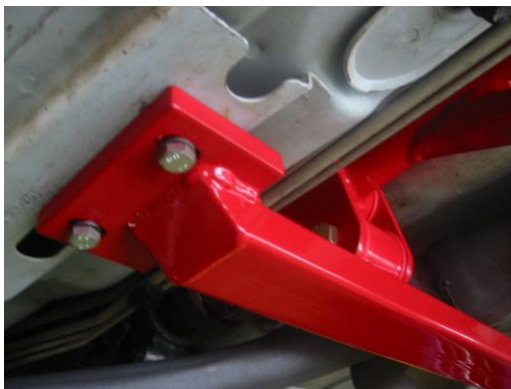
Cross brace mounted in place with 8mm x 30mm bolts
